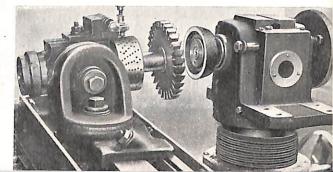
(above).—Grinding cutting face of teeth of gear hob on "Alba" grinder
